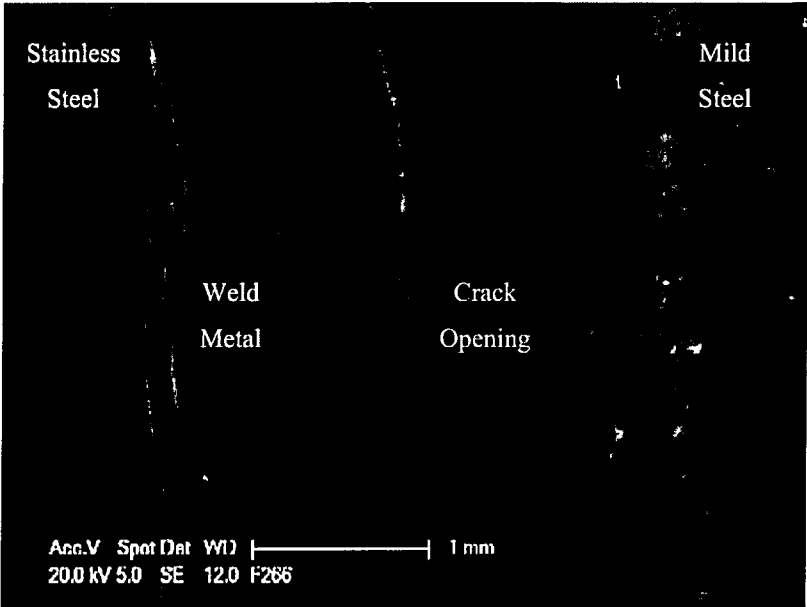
SEM image showing the underside of the weld bead illustrating the crack propagation on the edge of the weld on the mild steel side.
